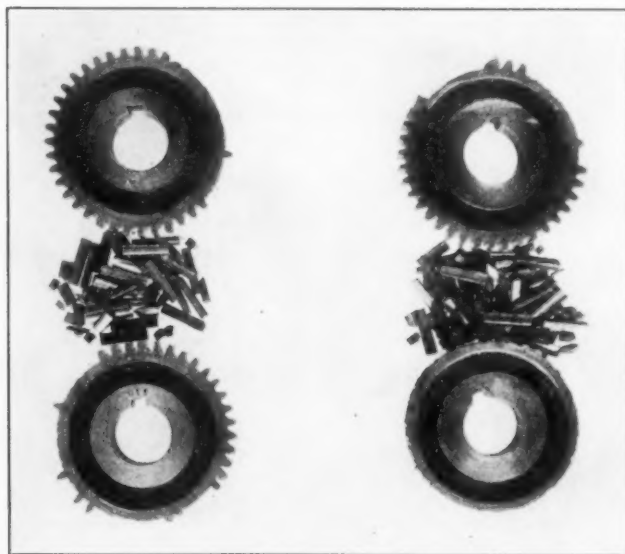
40 TOOTH ENGAGING 40 TOOTH, TEST 011, SERIES 1 AND 47, SERIES 2
